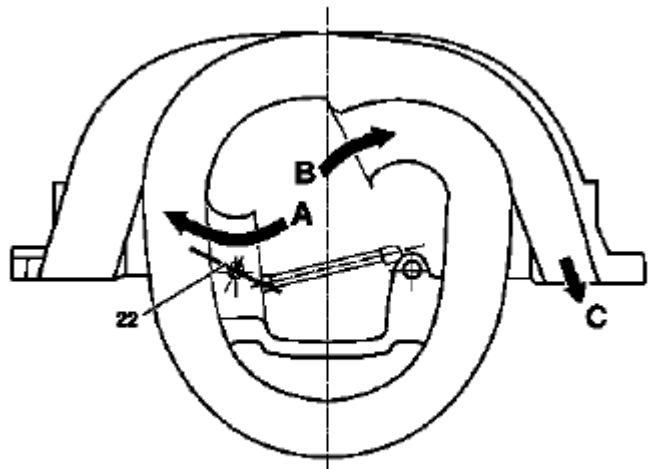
Identifying Variable Intake Manifold - Shown On Engine 113
